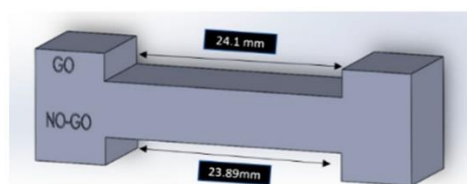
GO-NO calibration gauge created for X–Y measurement of the coupon, with the GO end featuring a 24.1 mm opening and the NO-GO end a 23.89 mm opening.
